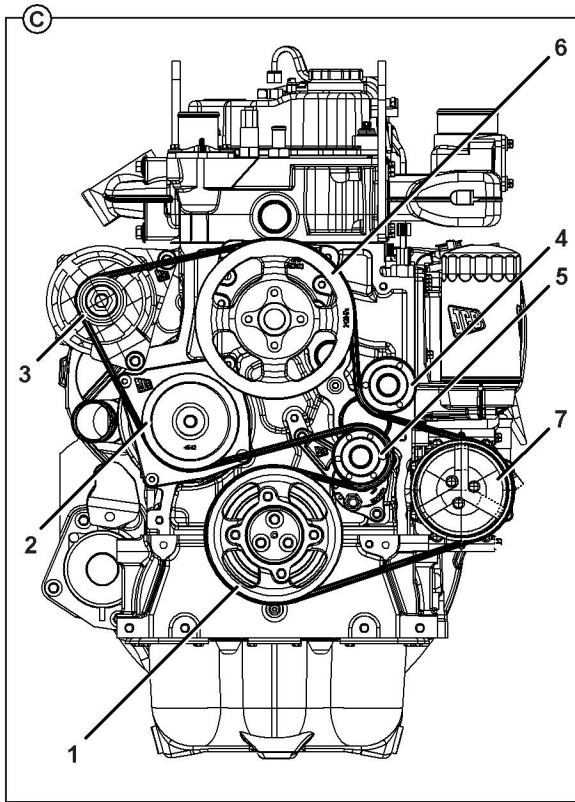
With air conditioning compressor, cooling fan pulley fitted
